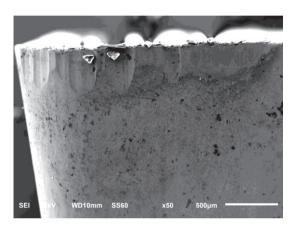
Flank wear surface after cutting FGI at 250 m/min for 1 min and 30 sec showing no adhesion layer formation.
